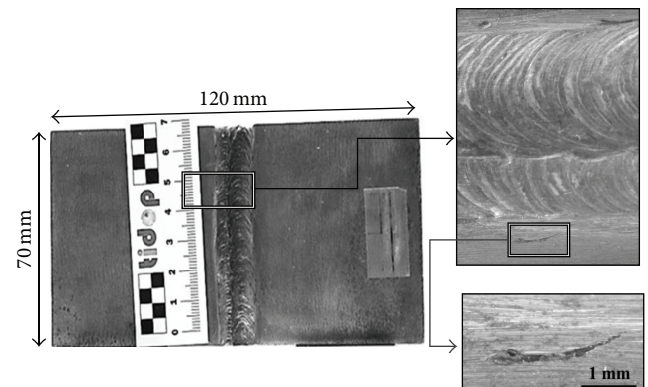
Low-carbon steel weld used as specimen. This presents a toe crack close to the limit of the weld (macroimage).
